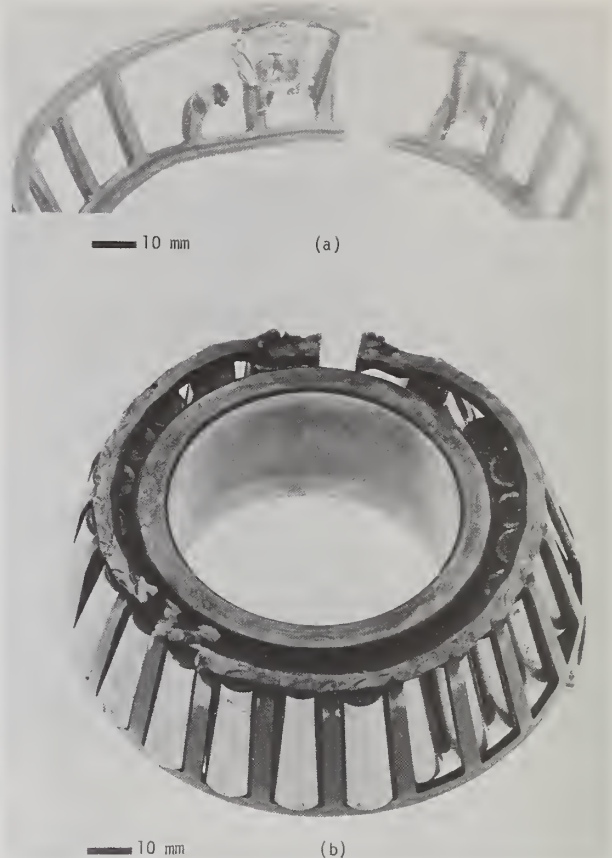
Section fracture of cages. In (a) the cage has fractured because of inadequate lubrication.
